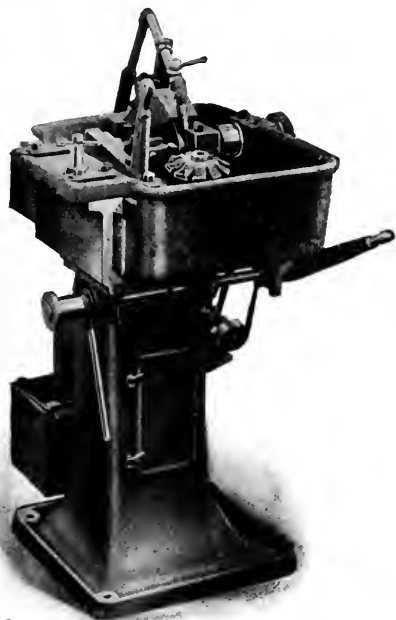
Front View of Cincinnati Gear Cutter Grinder
